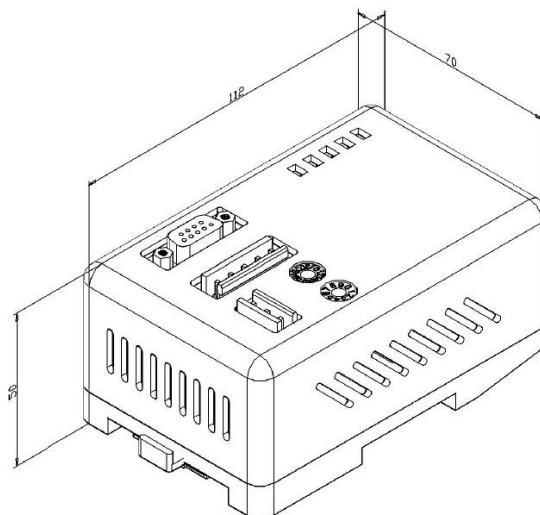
Gateway Outline Dimensional Drawing (112*70*50, unit mm)
